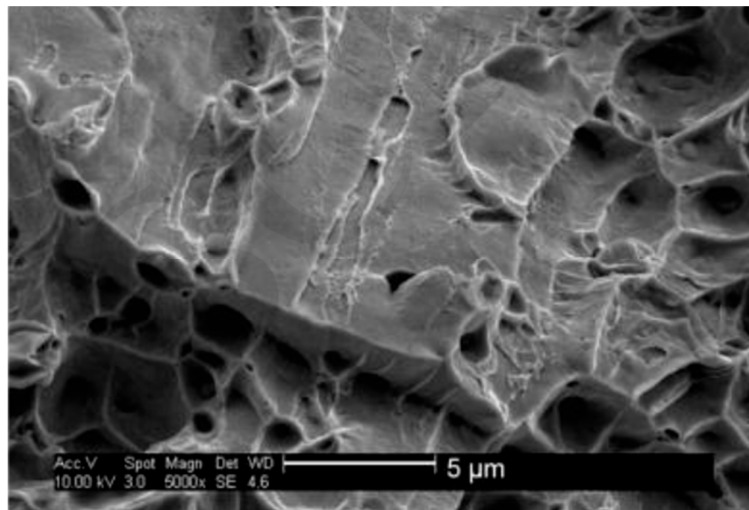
Fracture morphology of tensile fracture surfaces of AD+H900 condition: as-deposited plus H900 ageing treatment [91].
